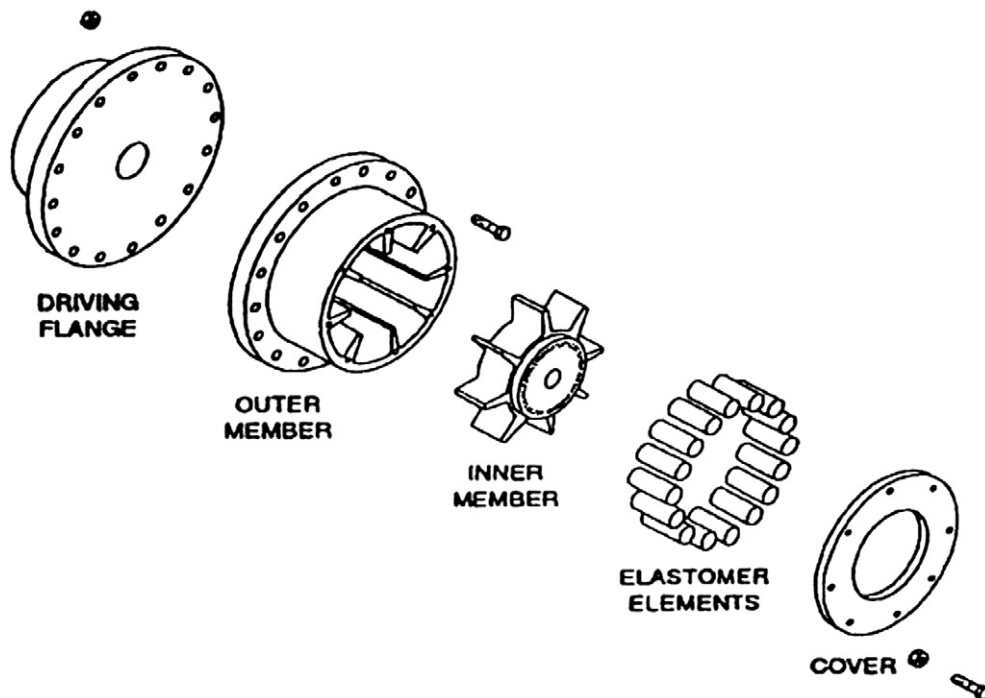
• Holset coupling (exploded view) non-spacer type
